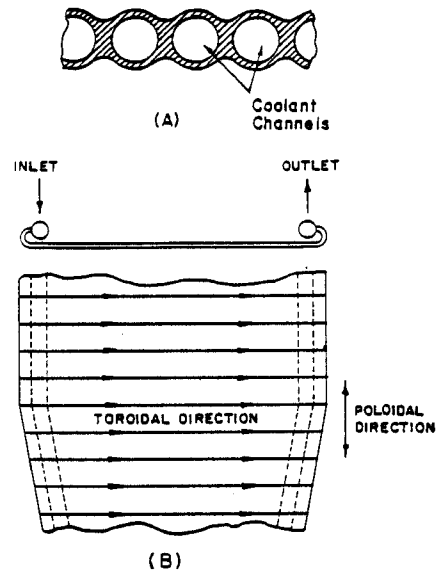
a. Cross section of membrane first wall. b. Section of first wall showing flow path.
